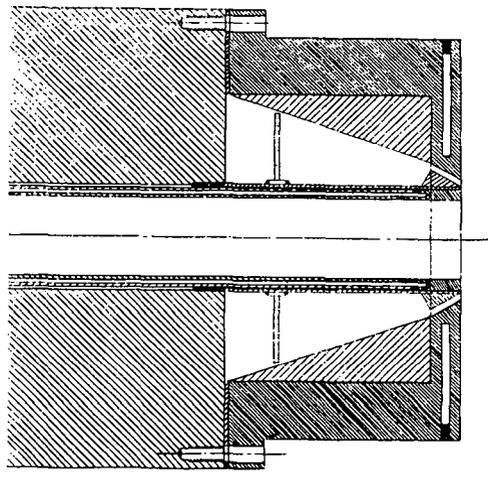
Schematic Drawing of Injector Nozzle and Head Assembly
